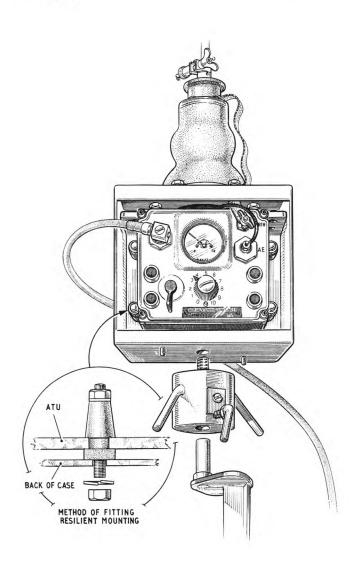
FITTING A VHF ATU INTO ITS DISMOUNTABLE CASE
